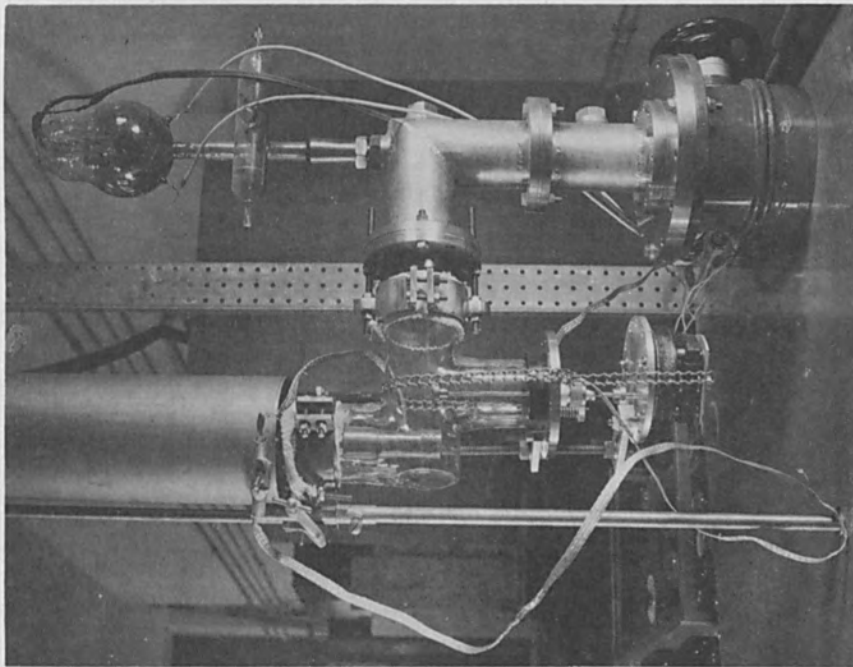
FIRST ELECTRON BEAM WELDING UNIT.
